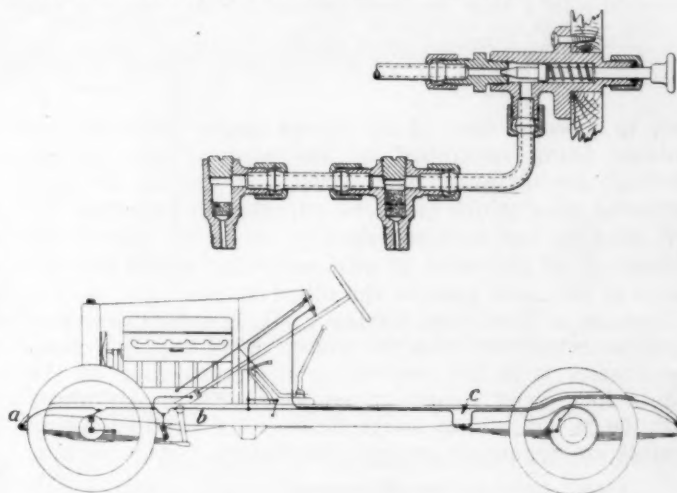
CHASSIS LUBRICATED WITH ENGINE OIL UNDER PRESSURE
